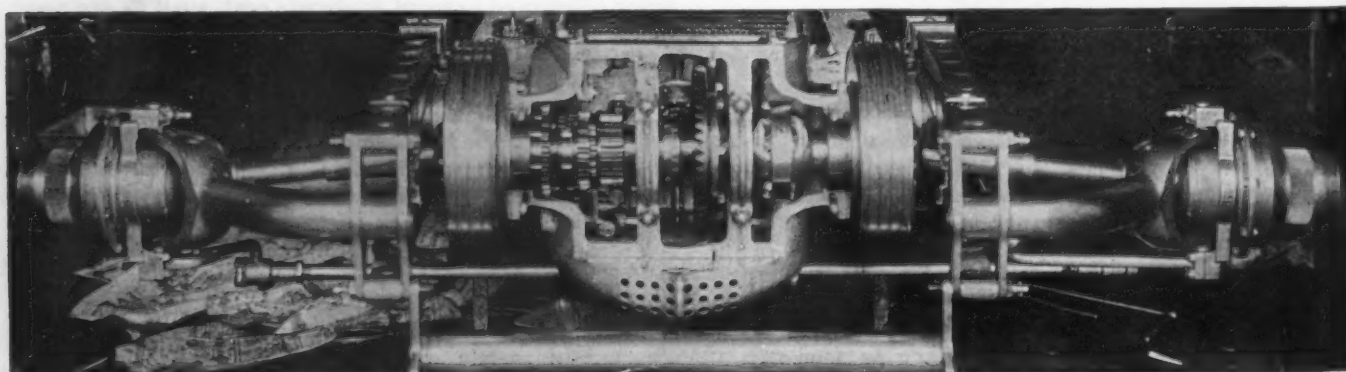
FRONT VIEW OF MILLER FRONT AXLE
